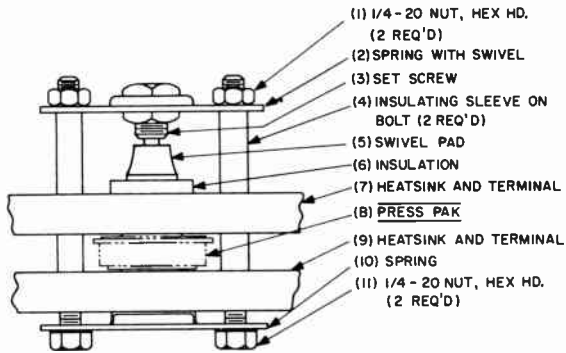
PROPER MOUNTING OF PRESS-PAK USING G-E MOUNTING KIT
